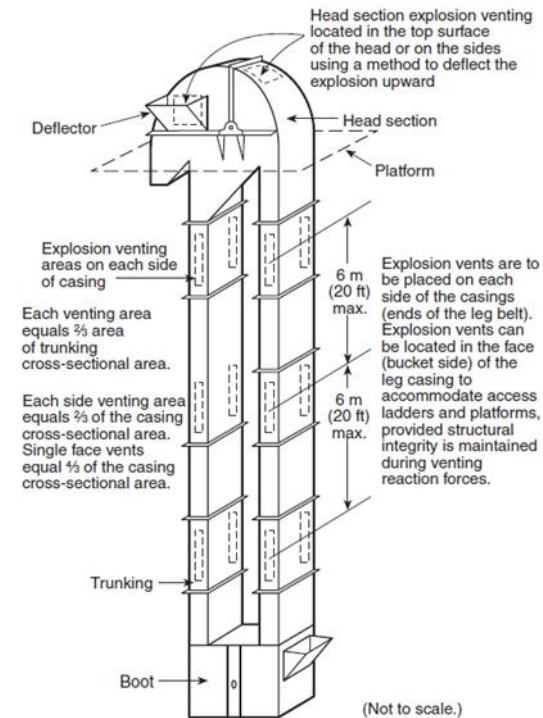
(b) Typical Elevator Explosion Venting for a Double Casing Leg.
